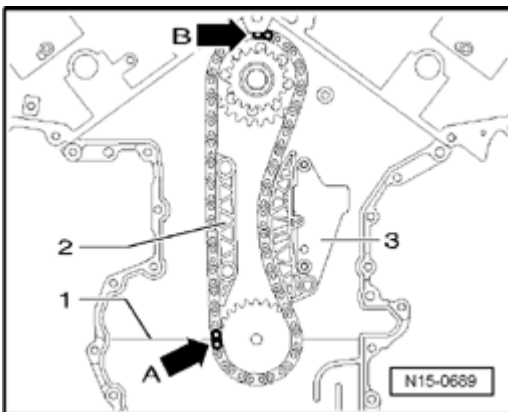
Identifying Copper Colored Link Of Roller Chain, Guide Rail & Chain Tensioner
